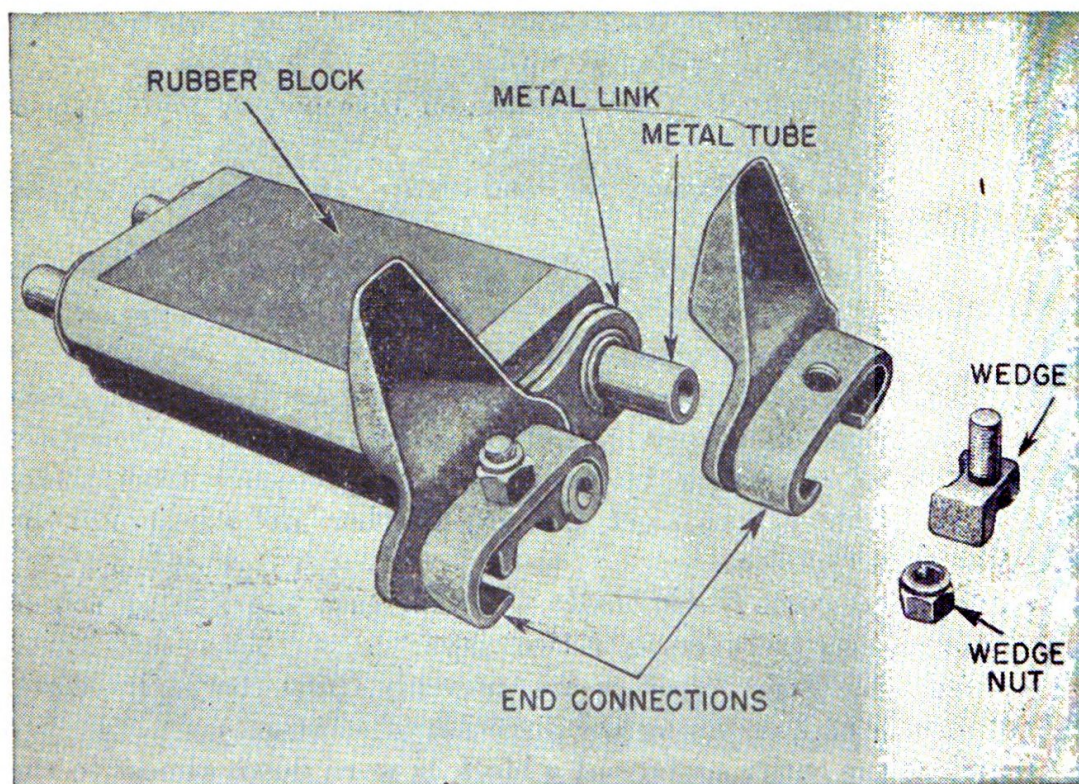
Track block with one end connection bolted on and one disassembled.
